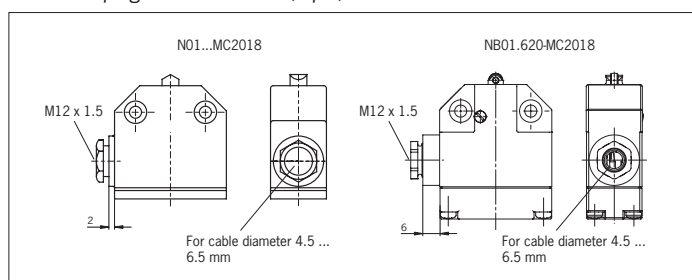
Dimension drawing of N01...MC2018/NB01.620-MC2018 with special cable gland
